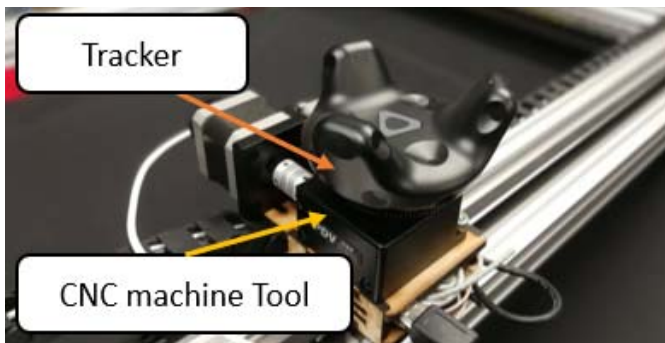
HTC Vive's Tracker mounted on the tool of the CNC machine.
